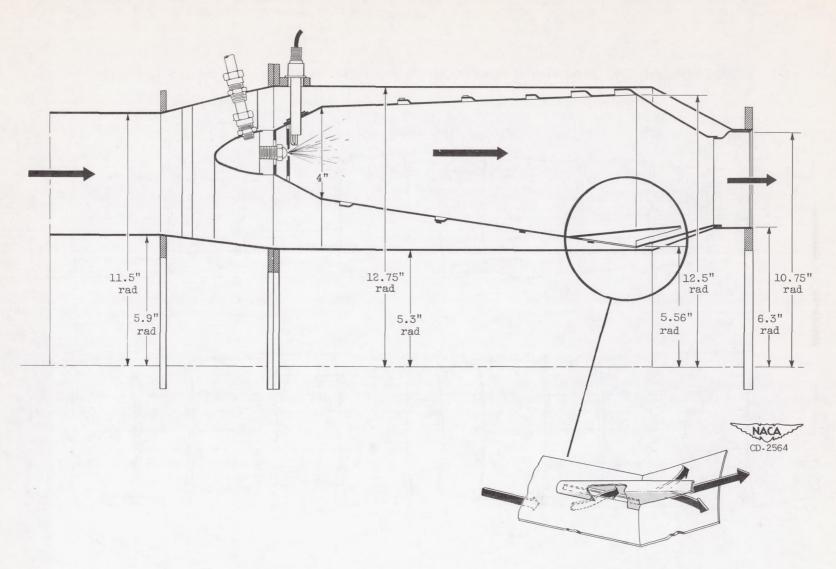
Assembled arrangement of combustor and housing for one-quarter-annulus setup showing detail of "finger".
